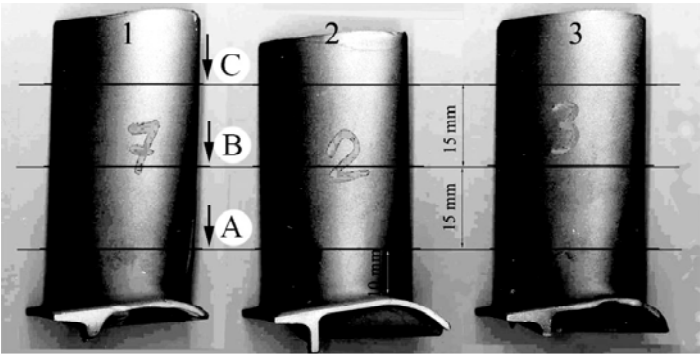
The pattern of cut of turbine blade casting with dimensions of 30x50 mm
